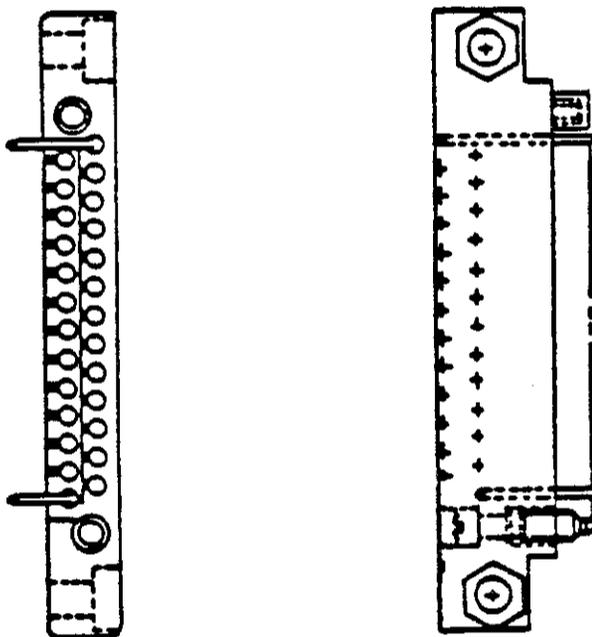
Right angle plug with pin contacts and fixed jackset shown (also available with alternate mounting hardware), MIL-C-55302.
